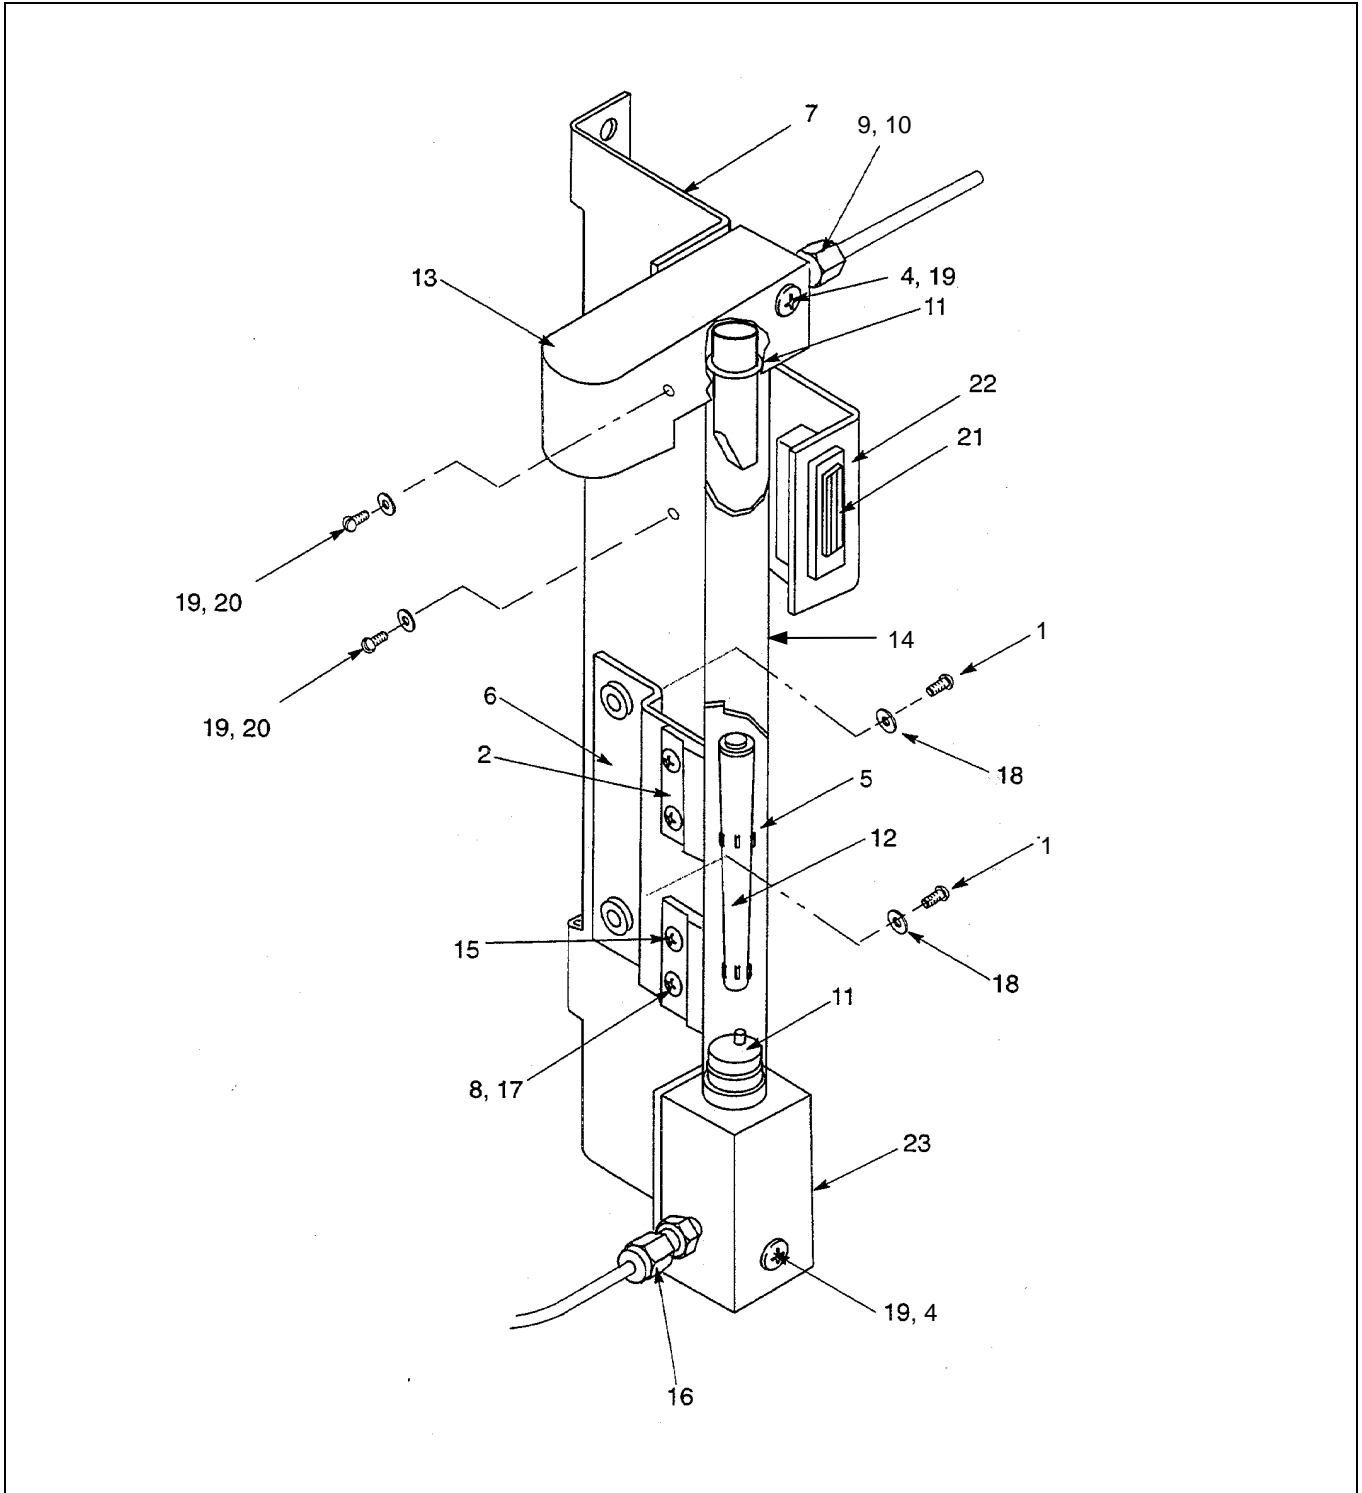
Ink Cylinder and Switch Assembly (SP390589)
